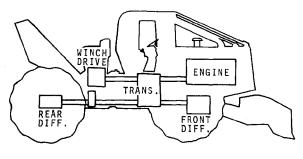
Winch Drive Line and Lower Telescoping Universal Joints (6 Points)
